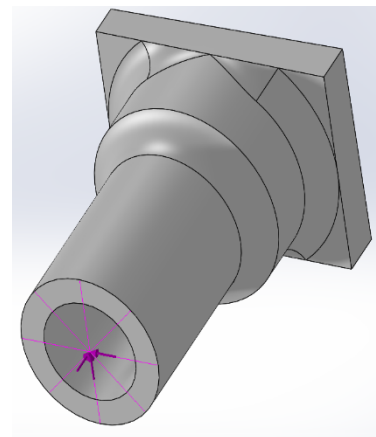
SECTION VIEW OF WHEEL HOLDER (ANALYSIS)
